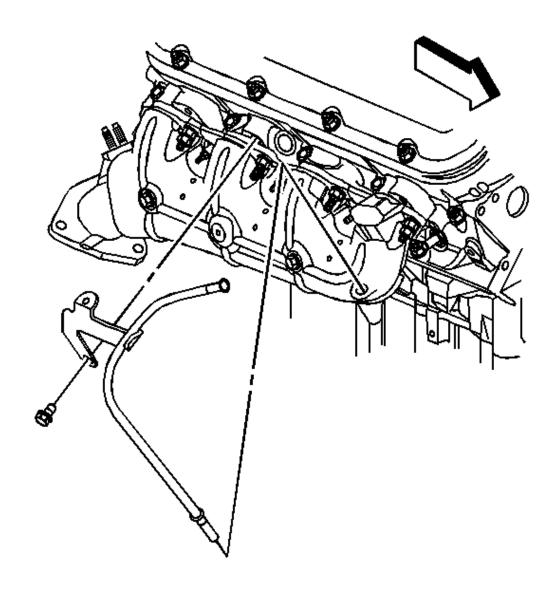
View Of Indicator Tube, Bolt & Bracket Courtesy of GENERAL MOTORS CORP.
